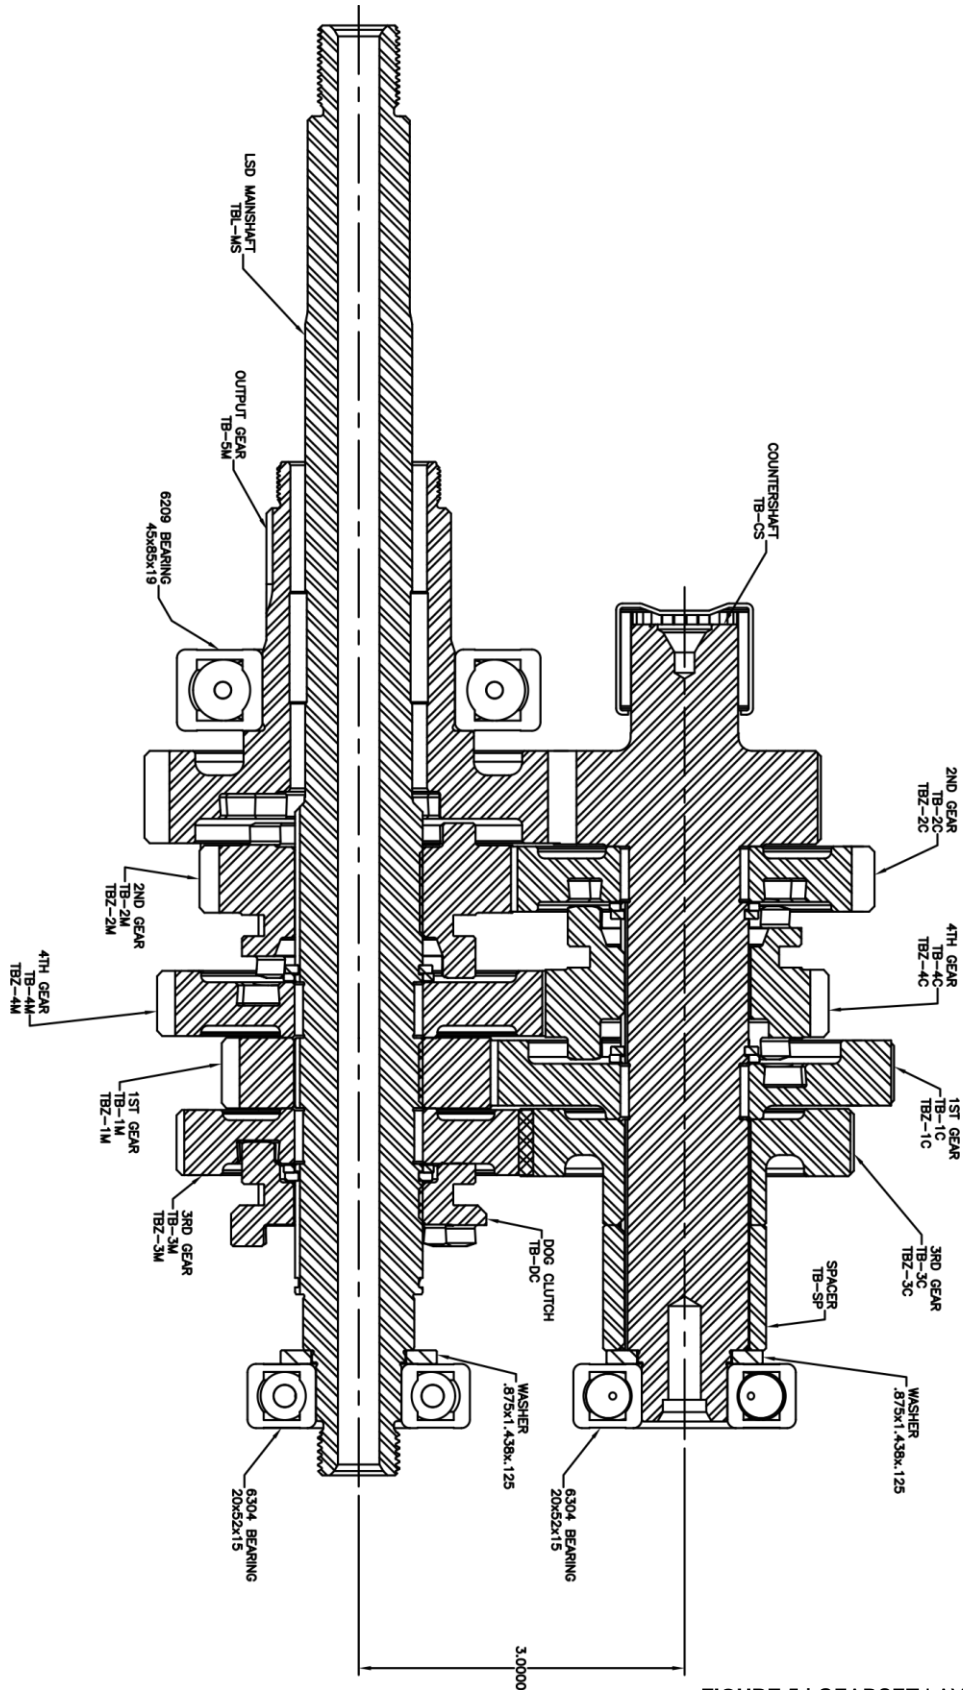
| GEARSET LAYOUT, TORQUEBOX 5-SPEED LEFT SIDE DRIVE (LSD)
